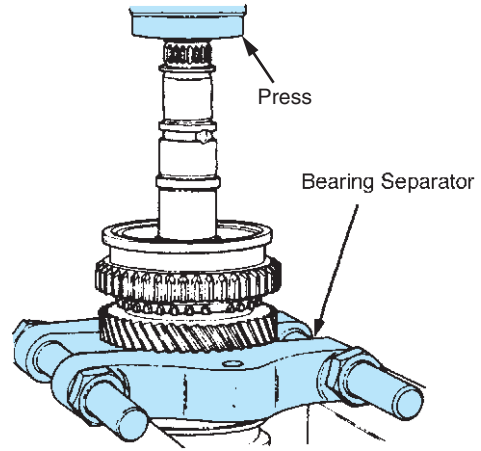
The bearing separator supports the speed gear, which, in turn, supports the synchronizer assembly as the mainshaft is pressed out of them.
